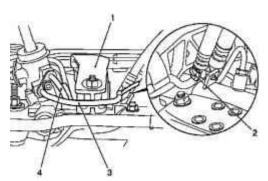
Removing the front suspension subframe: 1 - bracket damping engine block, 2 - holder, 3 - supply pipeline, 4 - reusable tube
